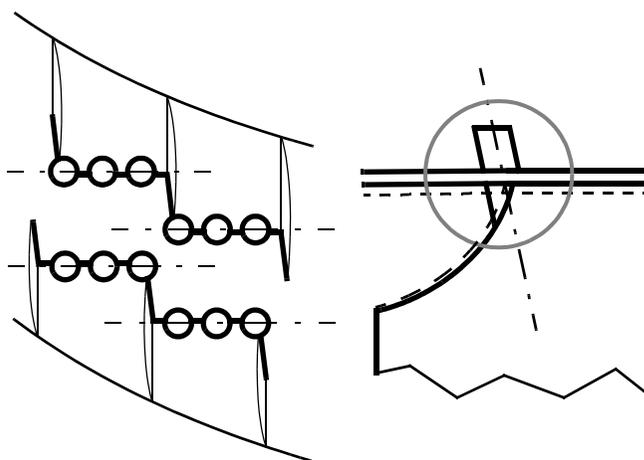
Bridge notches on a new bridge (cap) should start somewhat closer to the center of the bridge instead of at the exact center of the bridge pins. This compensates for the grooves that form in the bridge cap over time.
